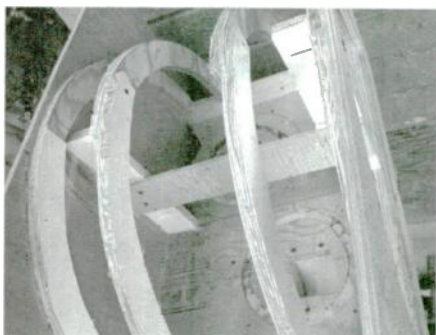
The completed large horn-brace assembly; note how the interior braces are lapped.
